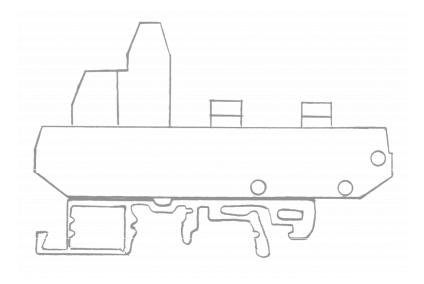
Digital Servo Axis Terminal Board Assembly Side View
